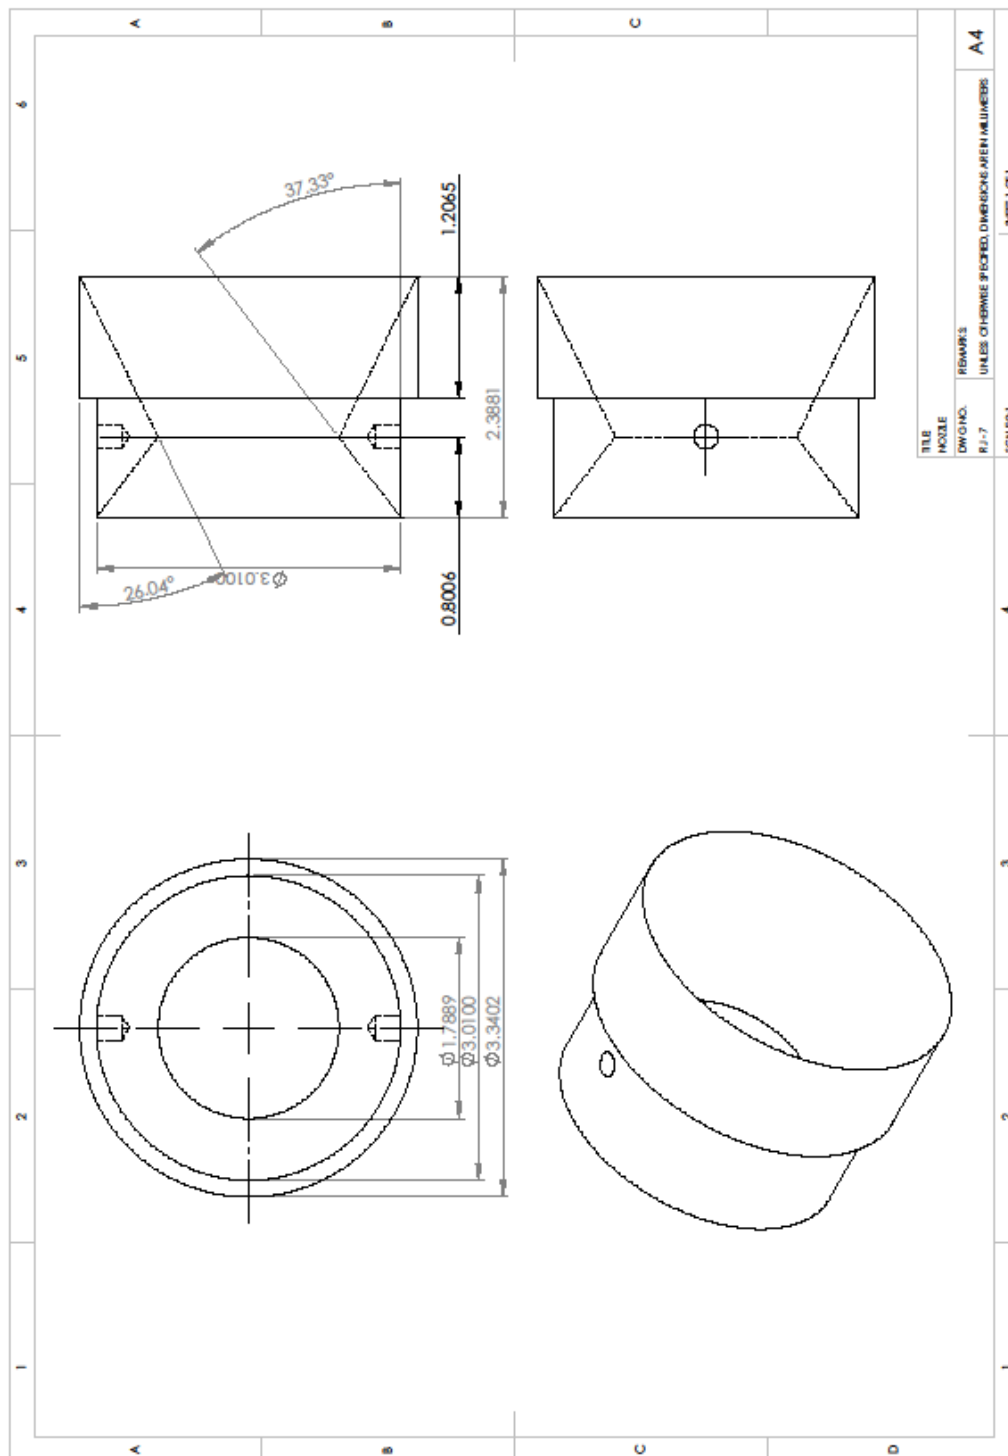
Part drawing: Ramjet Nozzle with 20% reduced throat area (RJ – 7b).
